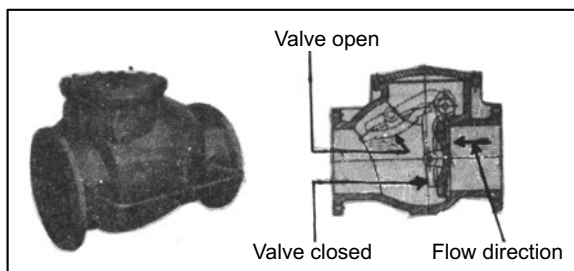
(b) A heavy-duty reflux valve provided with a by-pass. A sectional view of the valve showing the rubber lined flap is shown on the right.
